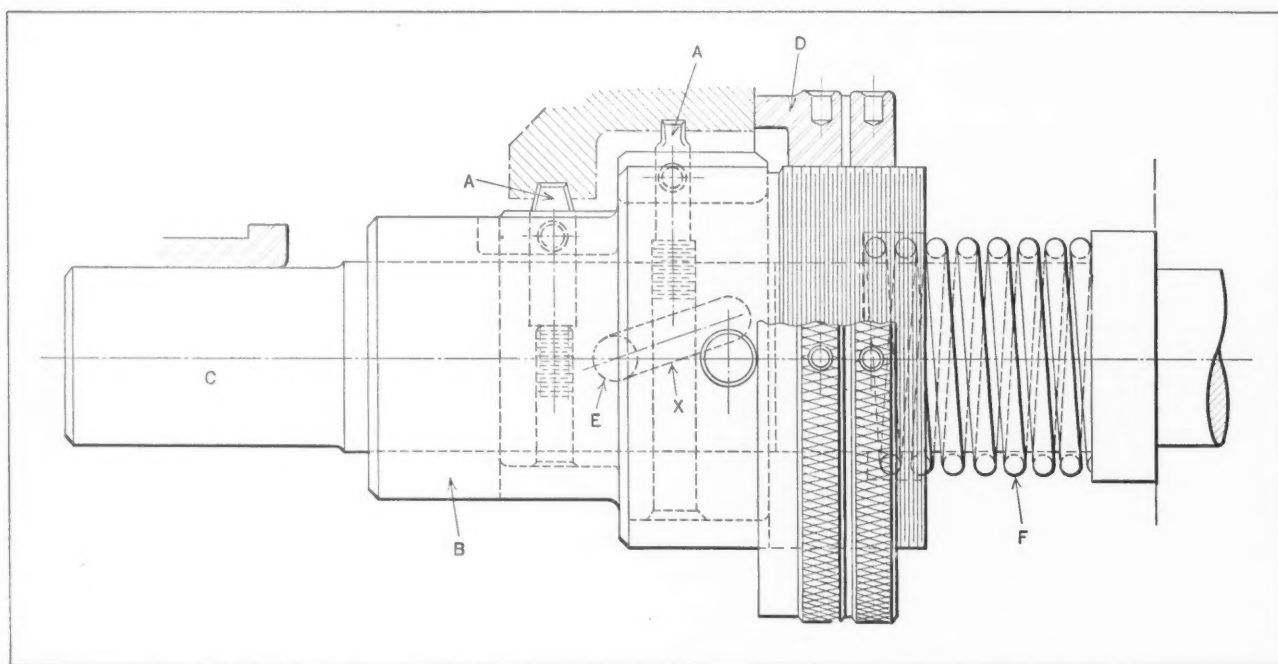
Tool Bits A Cut Recesses in Counterbored Holes at Accurate Distances from the Face of the Part, as Gaged by Stop-nut D
